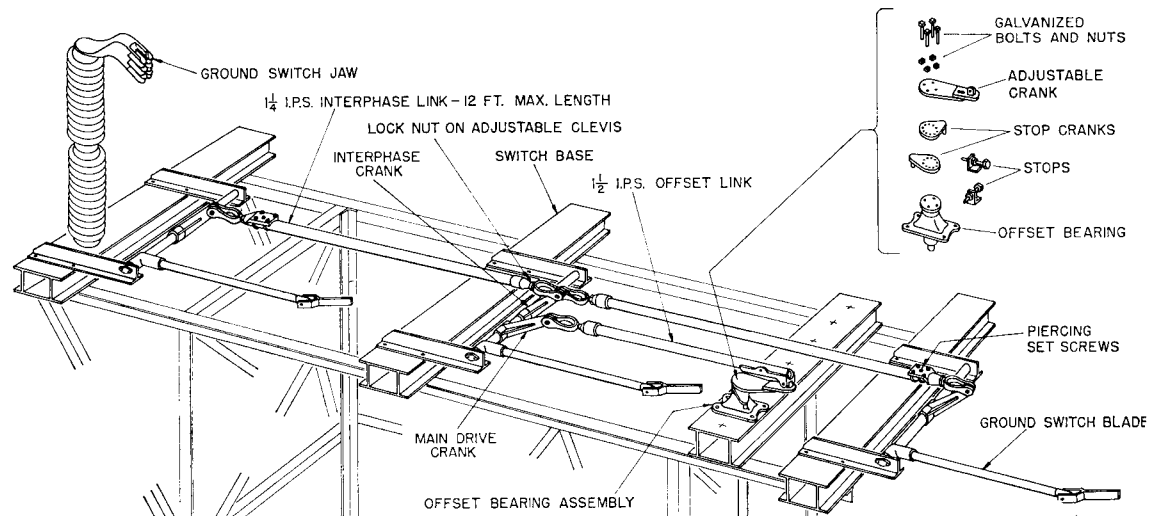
Exploded view of single-pole AG-7 grounding switch.
